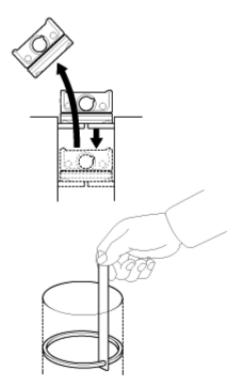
Checking Piston Ring End Gap Courtesy of HYUNDAI MOTOR CO.
